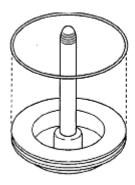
Identifying B1 Brake Piston Components Courtesy of MAZDA MOTORS CORP.
